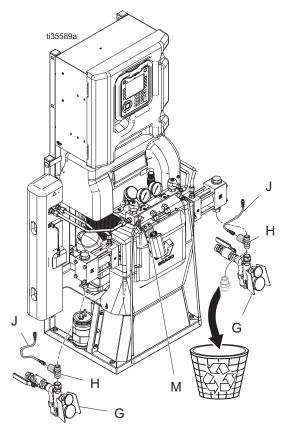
Install Inlet Sensors on Reactor 2 Hydraulic
